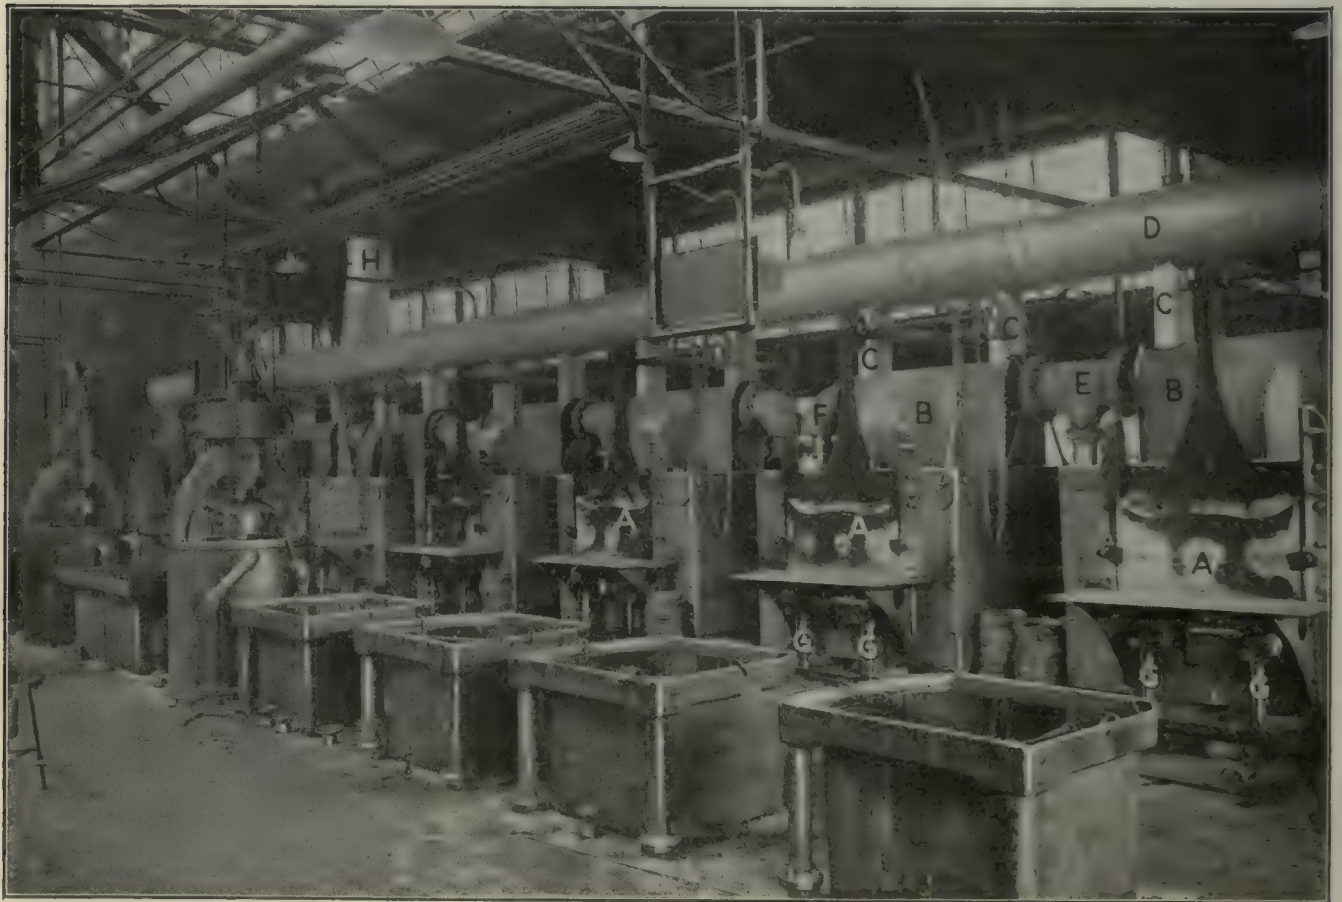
LATEST HARDENING ROOM, SHOWING ARRANGEMENT OF PIPING
